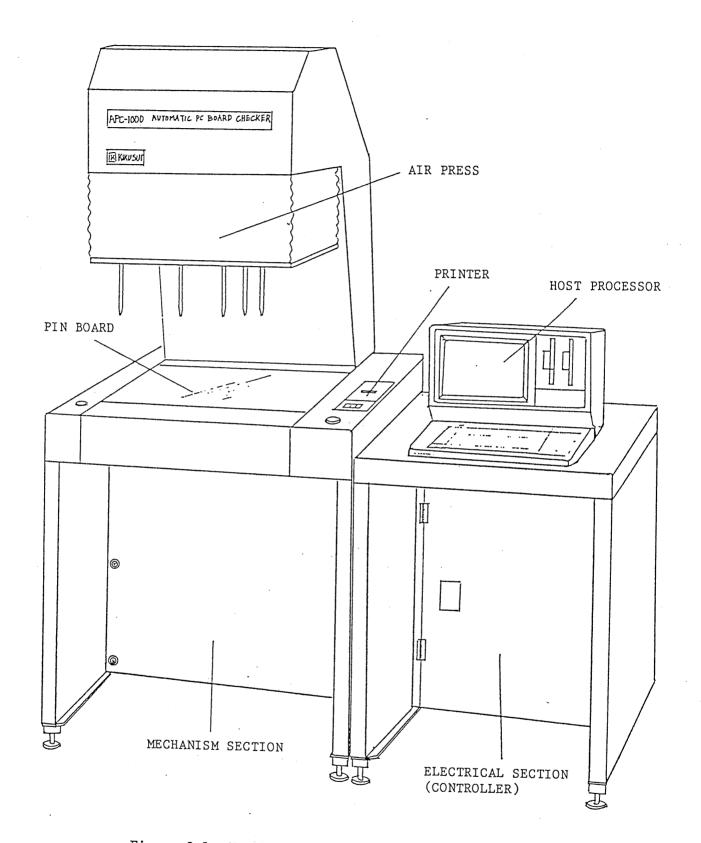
AP-1000 Automatic PC Board Assembly Tester
